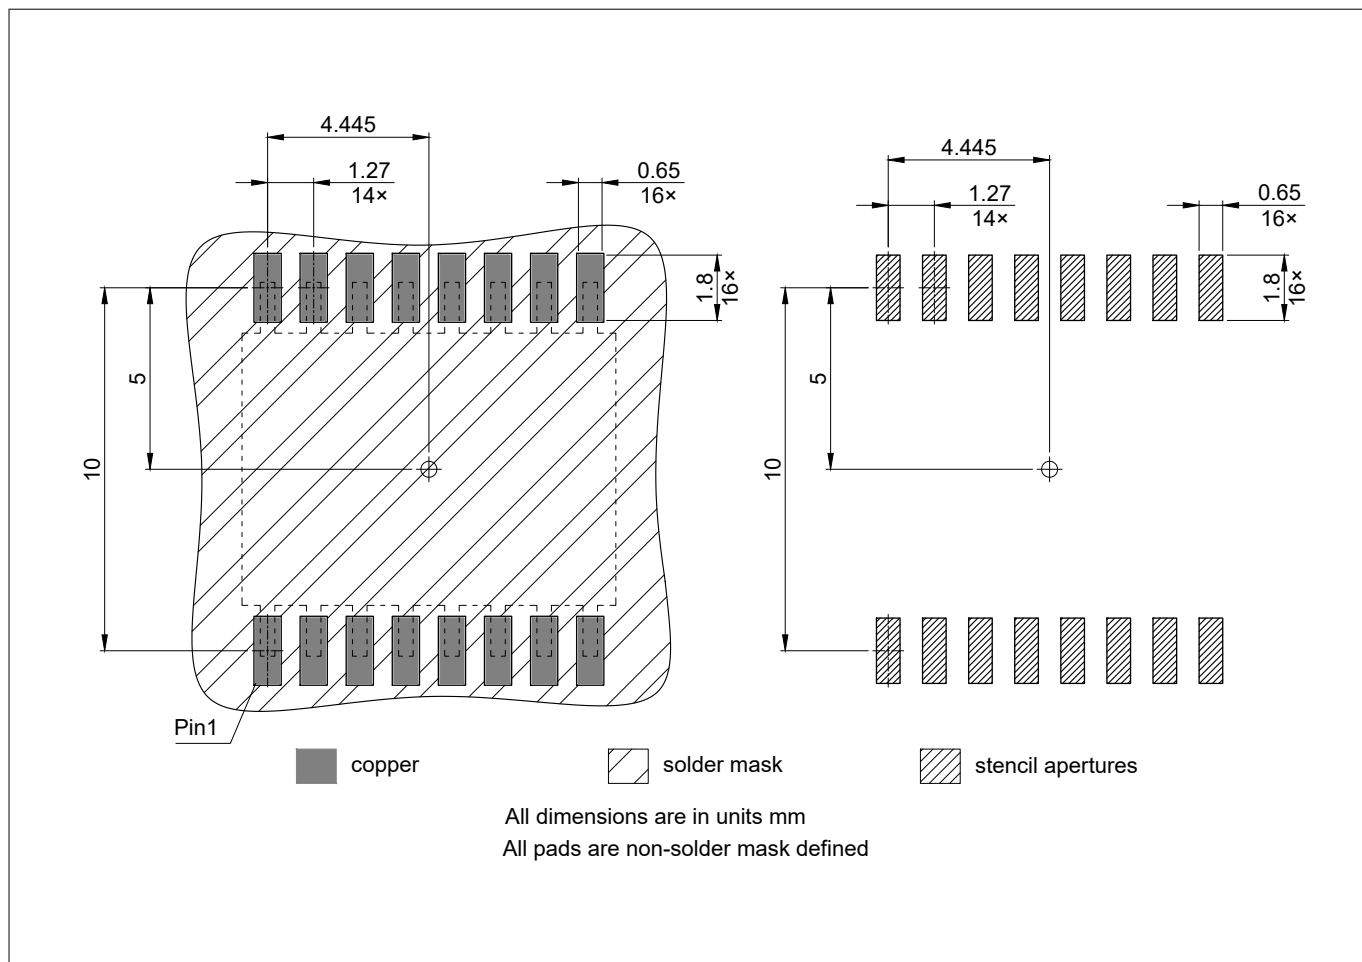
PG-DSO-16 wide-body 300 mil footprint
